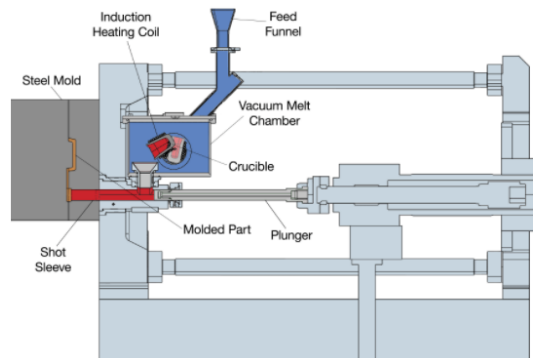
Amorphous metal injection moulding process by Liquidmetal, maximum sample dimension of 100 mm [41]
